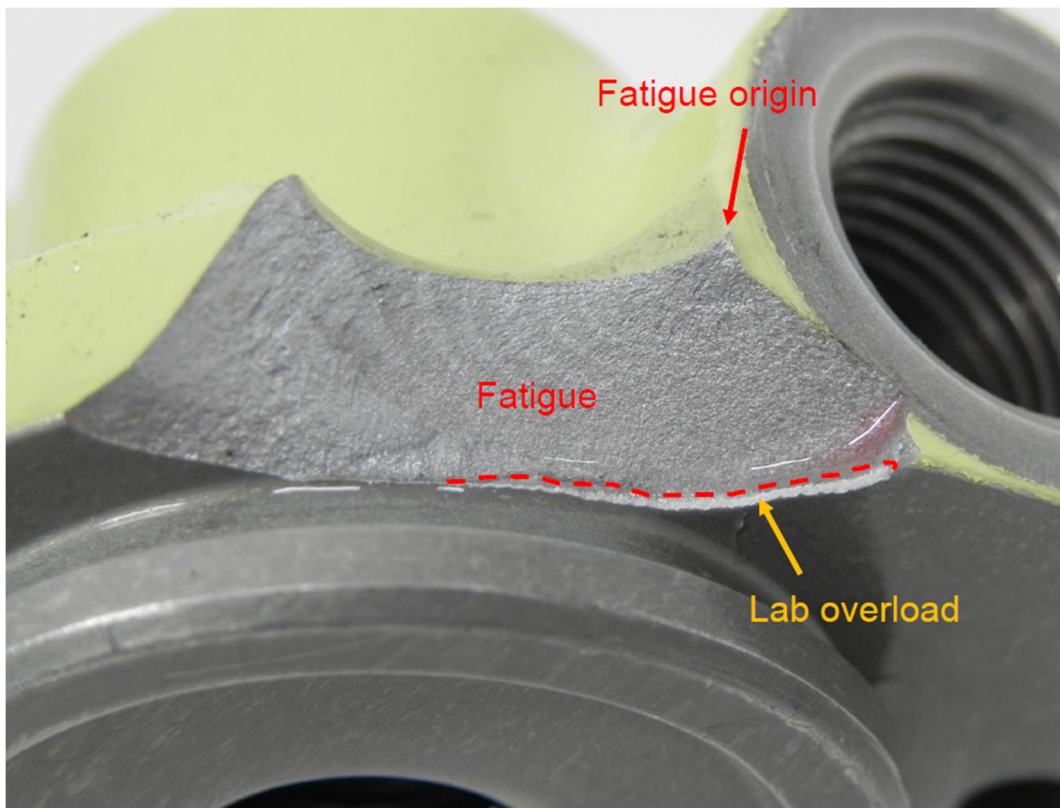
Areas of fatigue cracking identified on the forward-left lug of the pedal damper check valve housing. (Image courtesy of Sikorsky)
